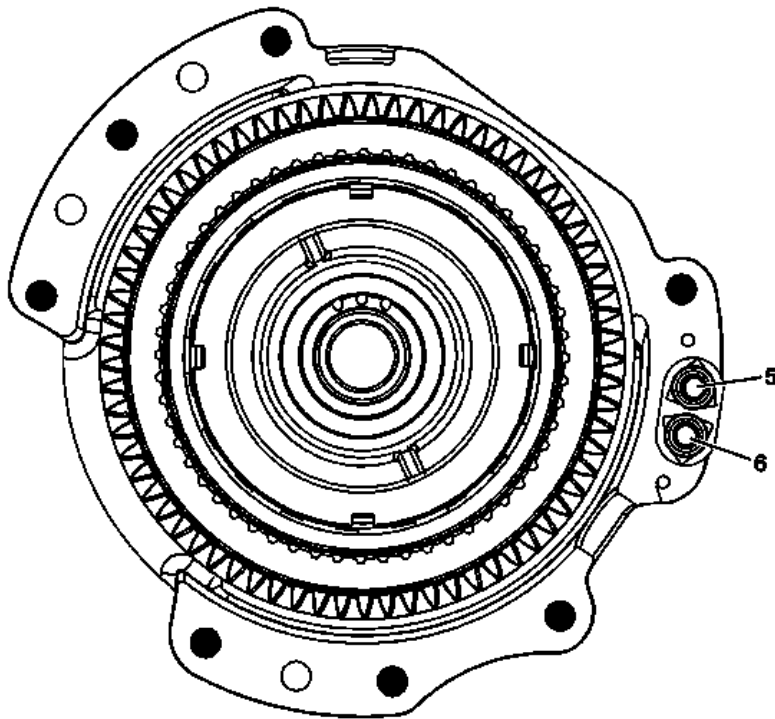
Identifying Front Differential Transfer Drive Gear Support Fluid Passages - Case Side
